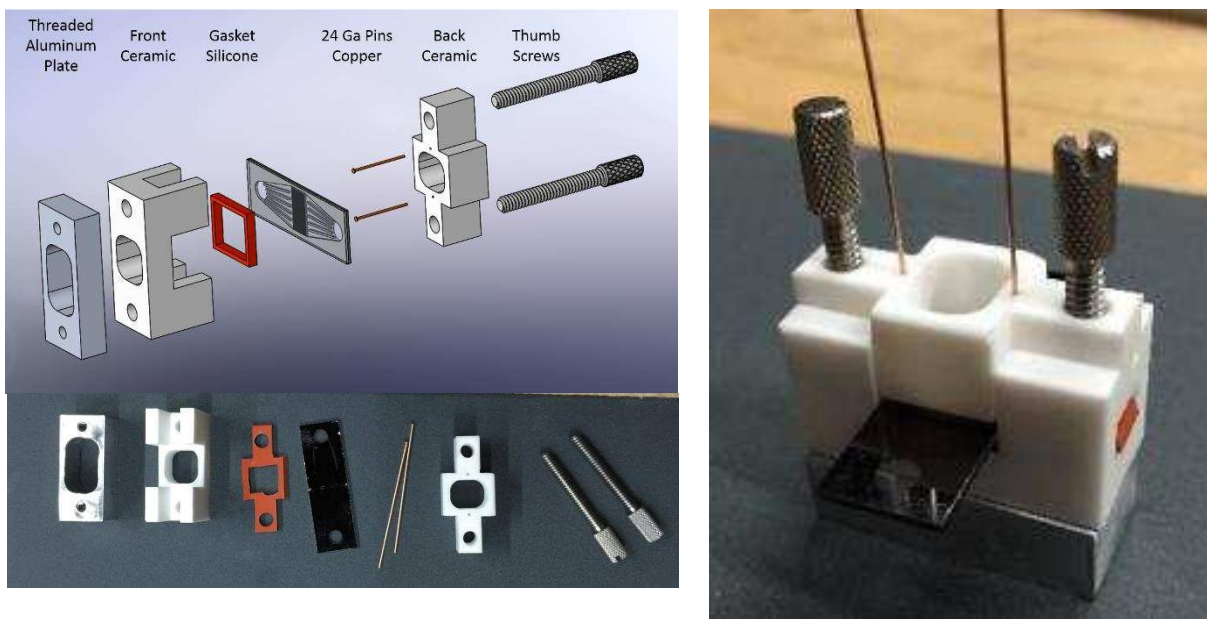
Top-Left: Solid model of electrical interface; Bottom-Left: Picture of components; Right: Assembled electrical interface
